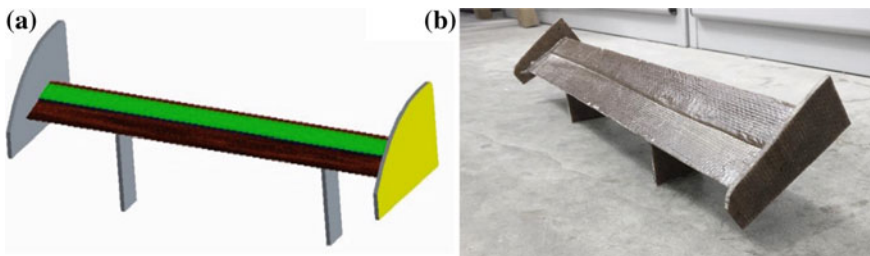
Spoiler design and fabrication a CAD model and b fabricated spoiler
